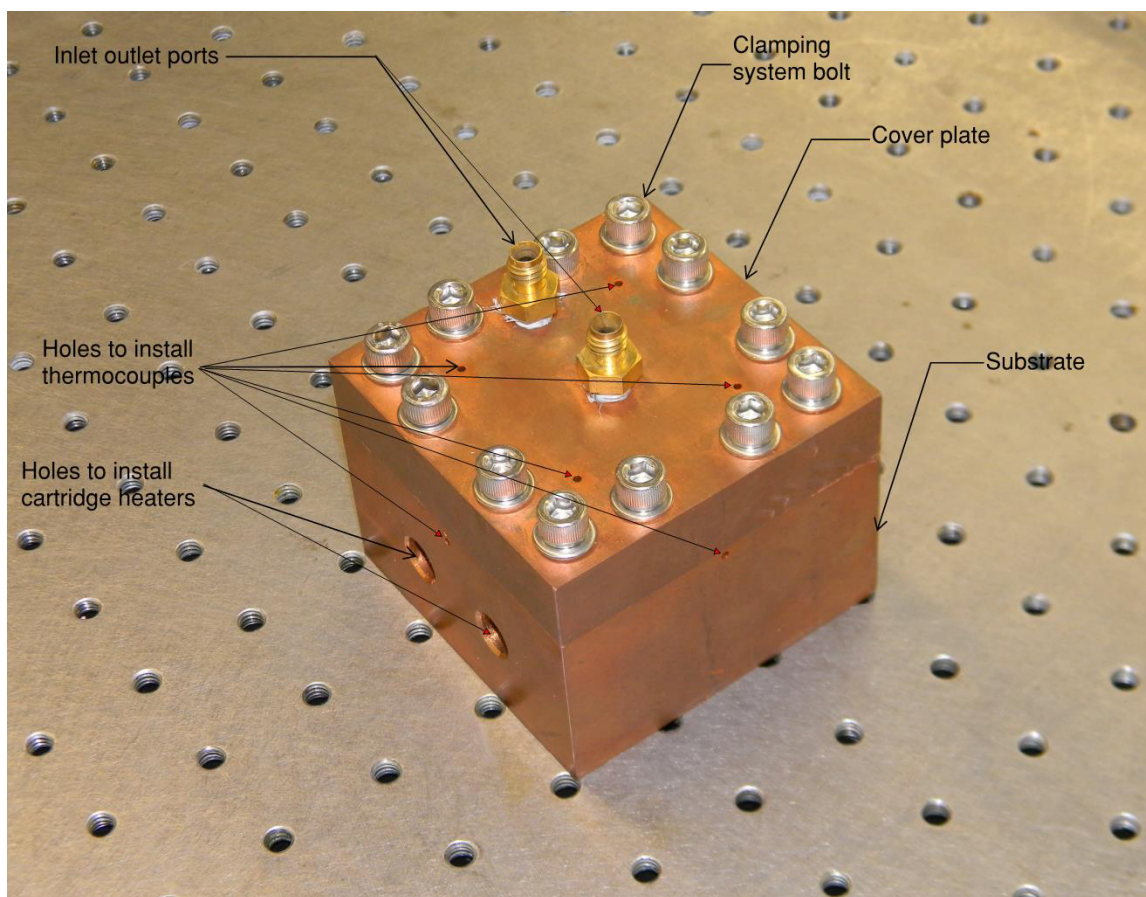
Photograph of the two machined and polished copper pieces
